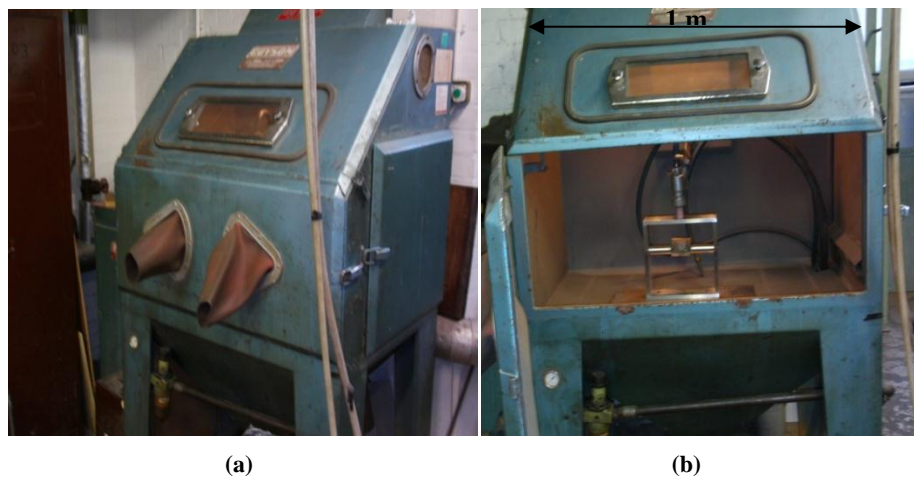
A shot blasting machine, (a) outside, (b) inside.
